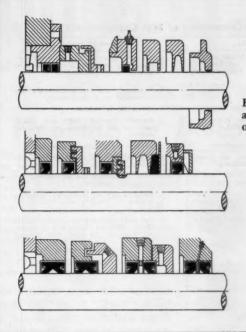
Seals and auxiliary sealing used on drive housings.
